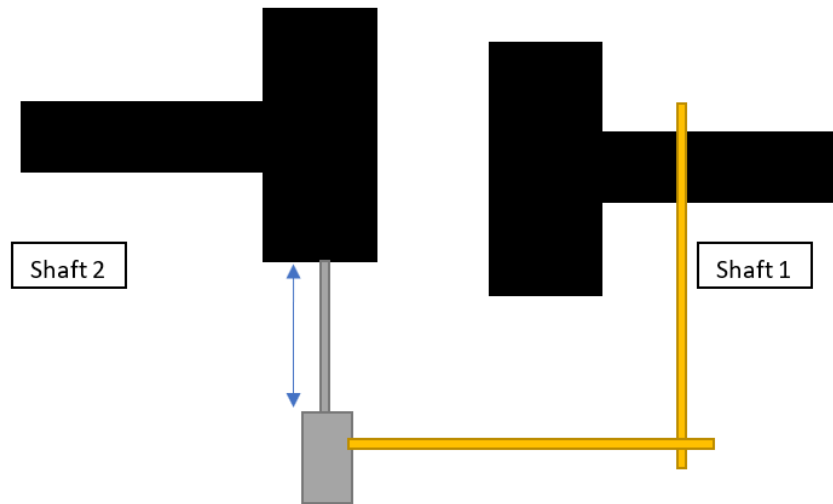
MEASURING TECHNIQUE FOR MEASURING PARALLEL MISALIGNMENT IN FINISH POSITION
